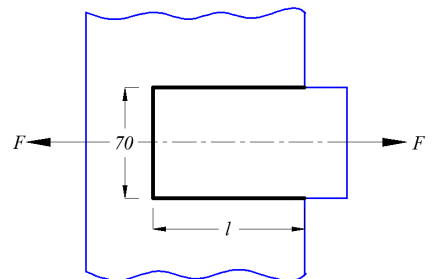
Single transverse weld and a double parallel fillet weld
